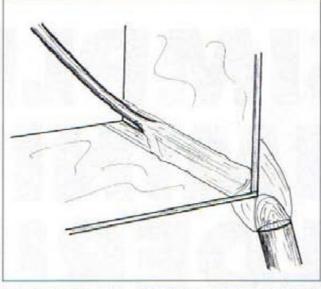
Jig or clamp the parts to be joined and run a fillet of solder across the join.
